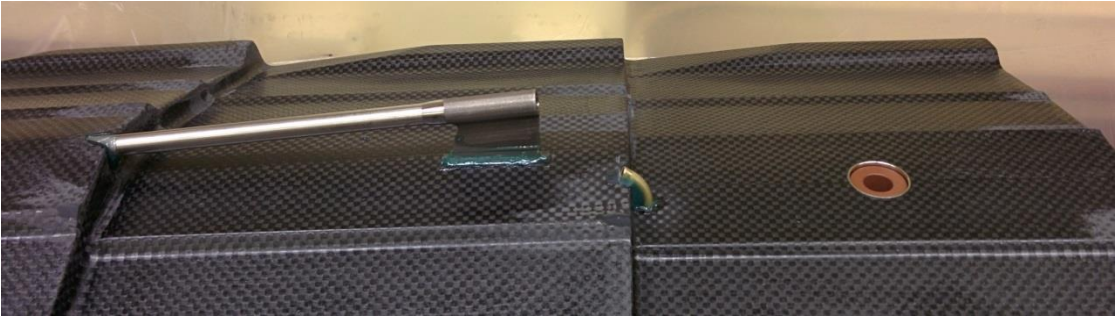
Drive Shaft Supports and Rudder Post Bonded in Place
